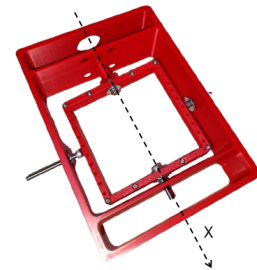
Inner frame sub-assembly for rotation about the X-axis.
